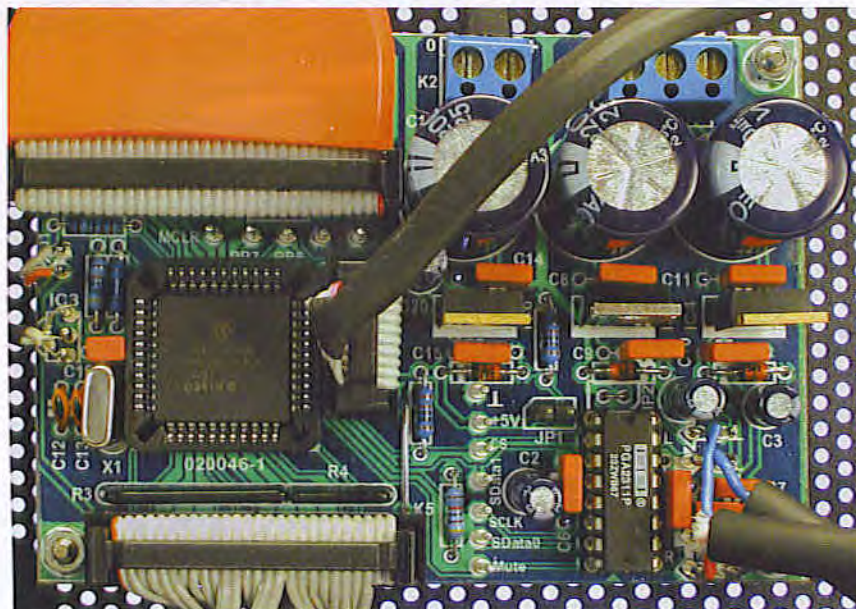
Component layout of the tightly arranged but single-sided main circuit board.
